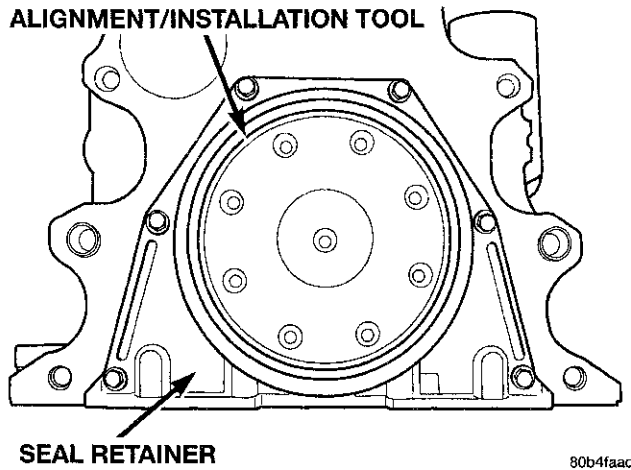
Aligning Seal Retainer with Alignment/Installation
